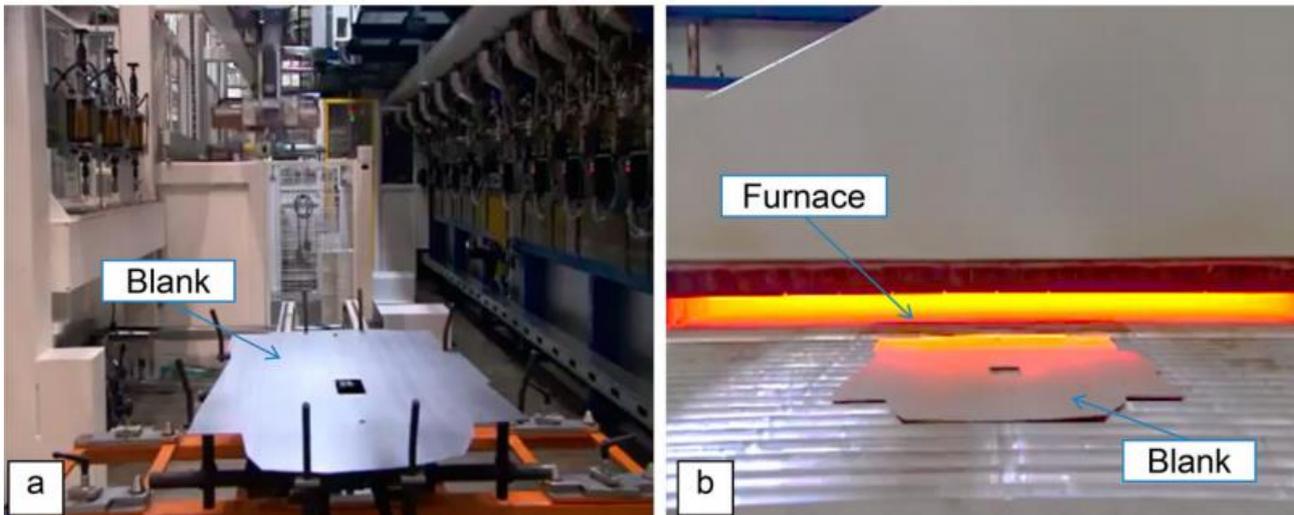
Referring to direct method: a) Blank after blanking operation; b) Blank led into the furnace to be hot formed.
